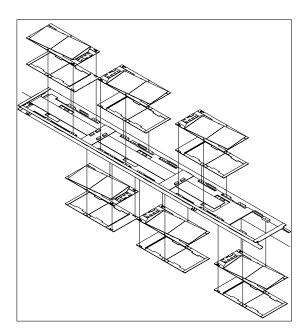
An exploded view of a CMS outer barrel rod is shown. The basic support structure is a carbon fiber beam with integrated cooling. Modules are mounted to either side of the beam. The modules have the electronics hybrids mounted off the silicon. As a result, adjacent modules are staggered radially to allow silicon from one module to cover the hybrid region of its neighbor. This is done to obtain continuous coverage.
